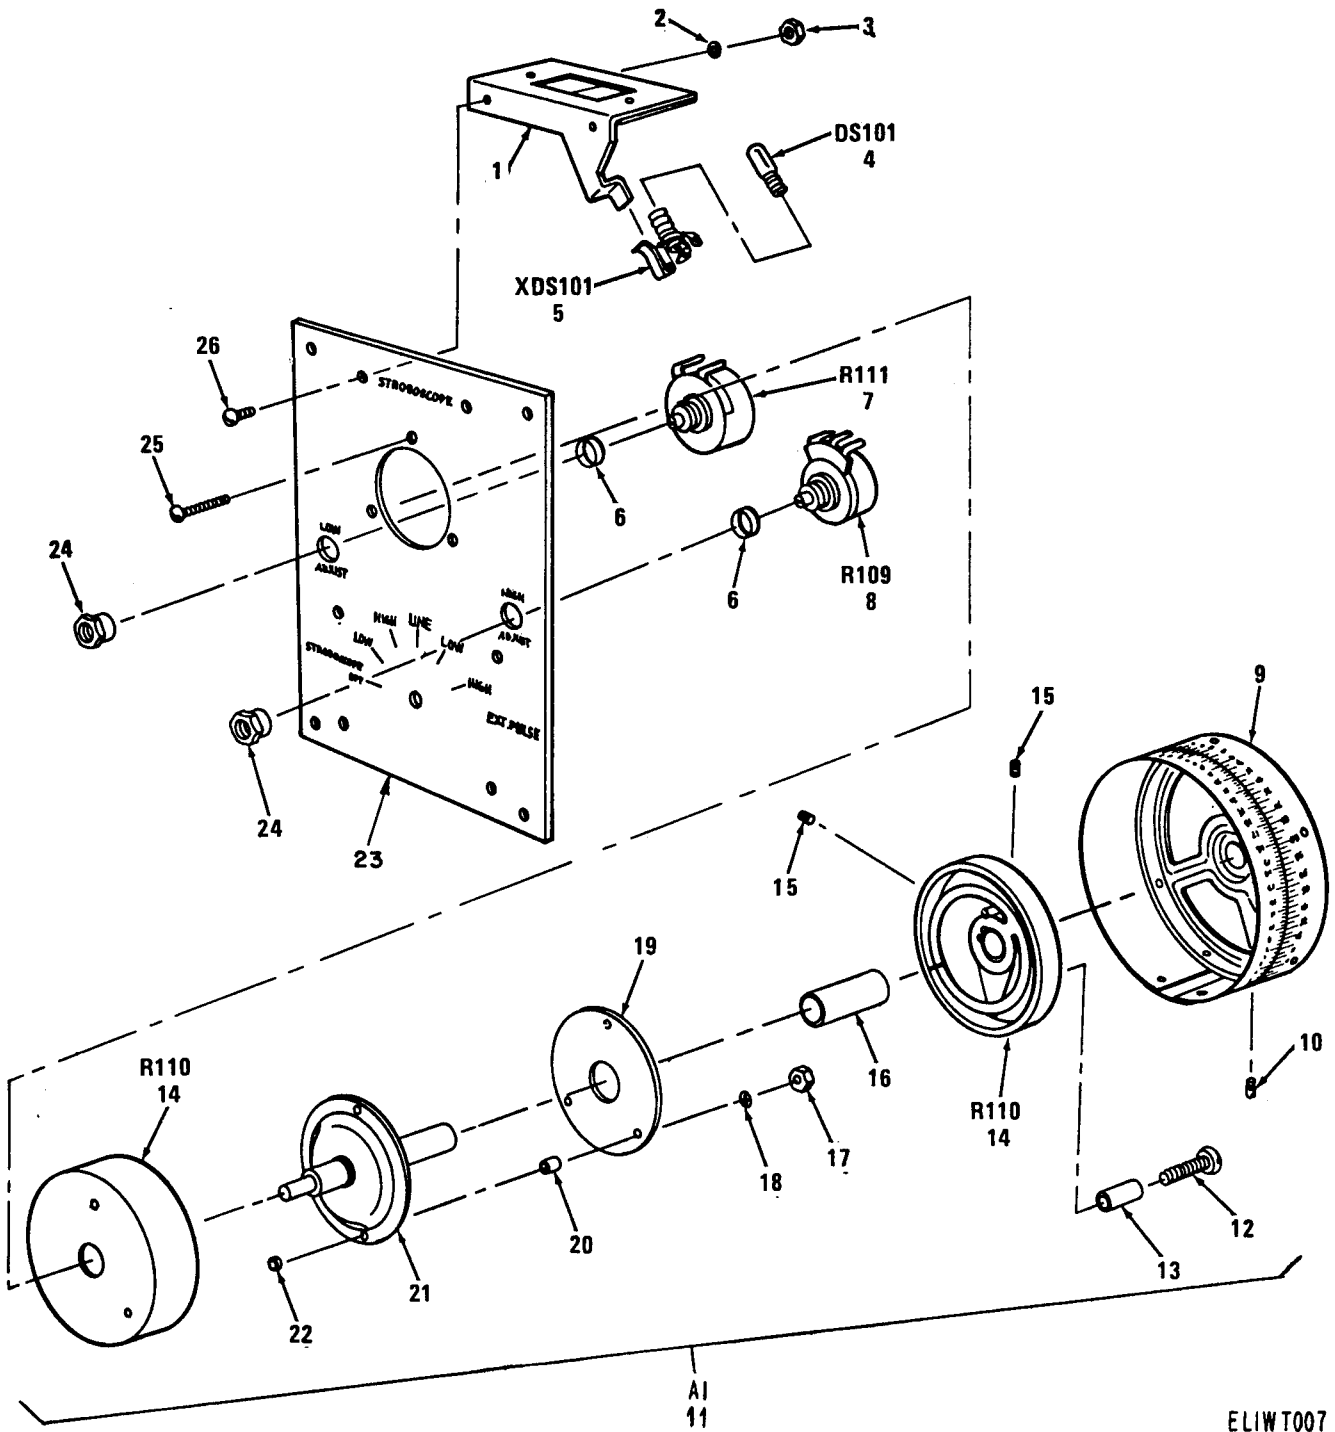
(2). Chassis assembly (Sheet 2 of 2).
